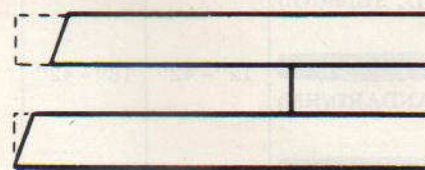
An excessive amount of wear on one rail is caused by inconsistent face angles, or by greater joint setting on either left or right side of chain.
